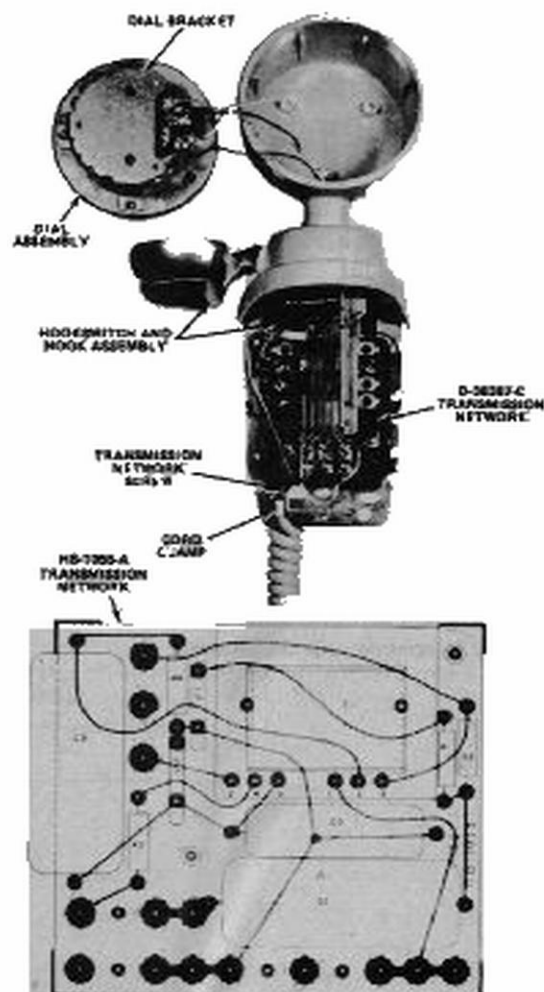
Front View of Type 183 Telephone With Dial Assembly and Housing Removed.
